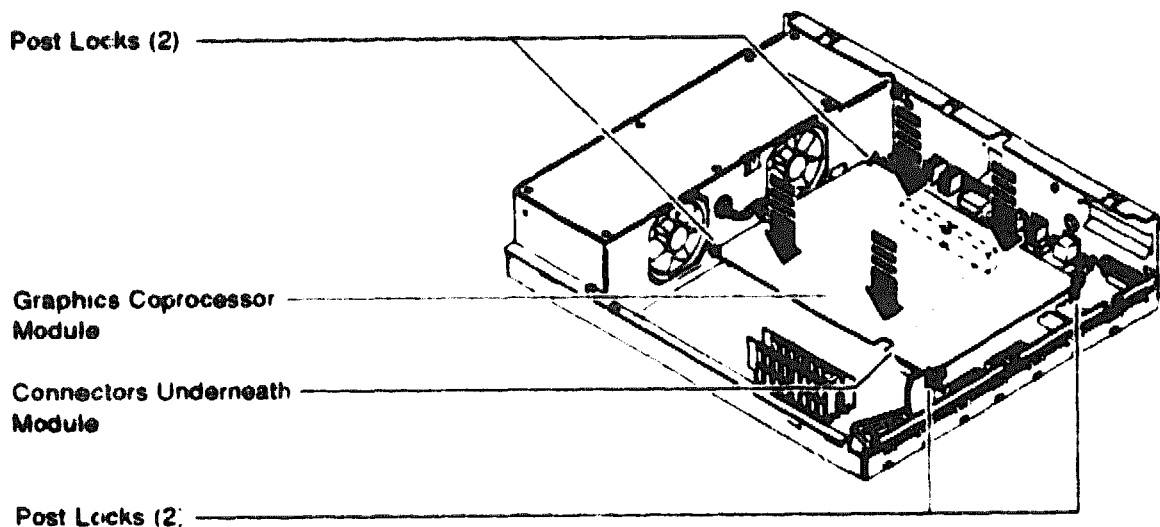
Mounting Post Locks on the Model 76 System Board
